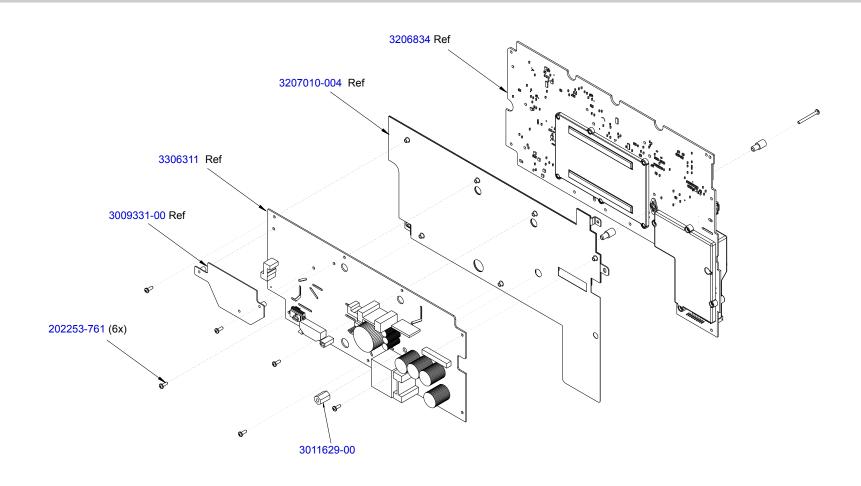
System/Therapy PCB assembly view 2 of 2
